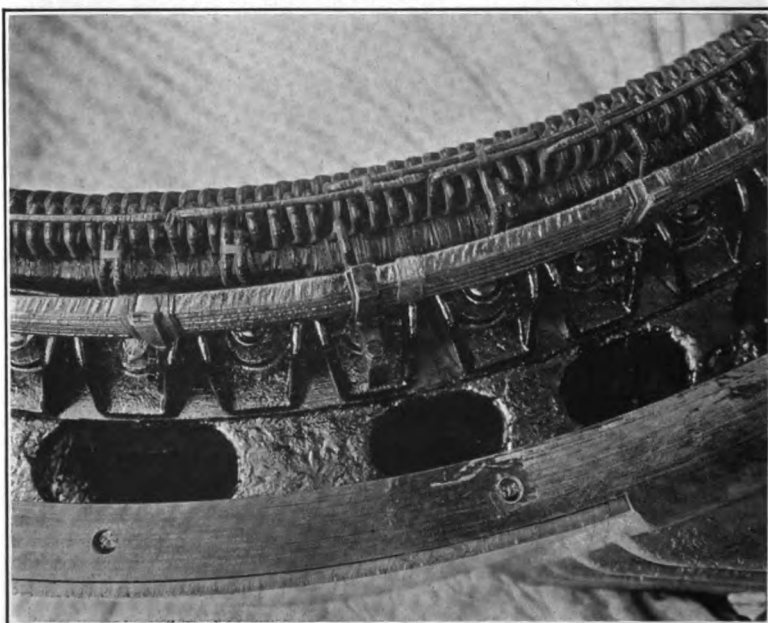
STATOR WINDING OF MAIN MOTOR.
